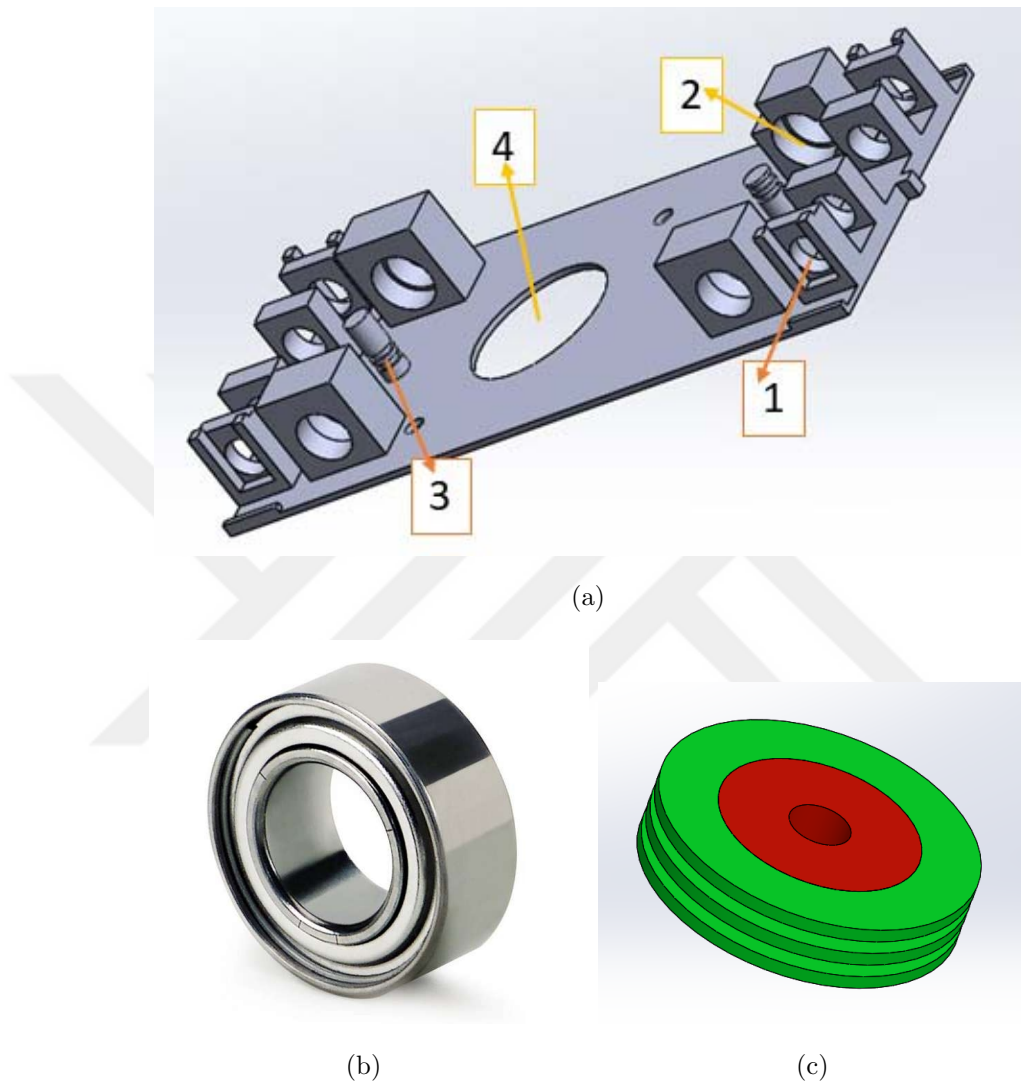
(a) Motor casing, 1: dc motors and rotary sensors, 2: bearing bedding, 3: string guider to spool, 4: spool actuation motor bedding and spool connection point (b) Roller bearing to connect wheel hub to casing (c) Spool connected directly to stepper motor to wrap strings, red: TPU, green: PLA
